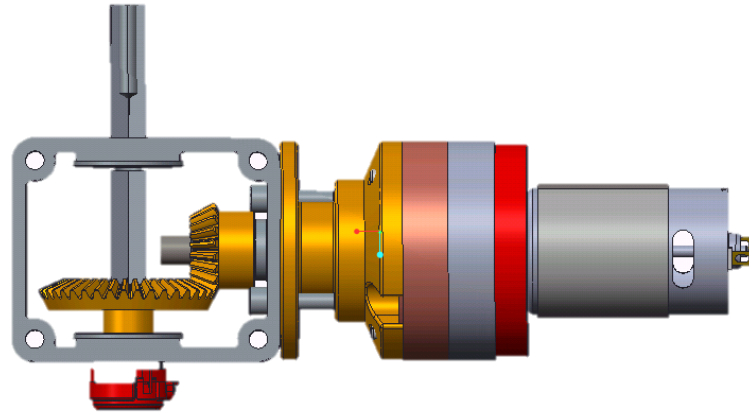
Assembled motor, planetary gearbox stages and right angle gearbox
